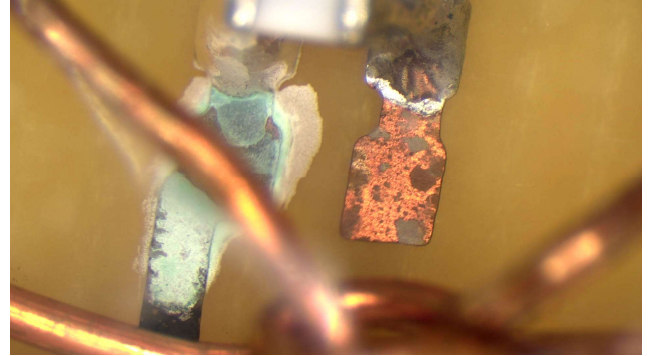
Corrosion and verdigris observed on a silicone encapsulated Cu-FR4 laminate PCB in a prototype active device following accelerated aging in saline.
